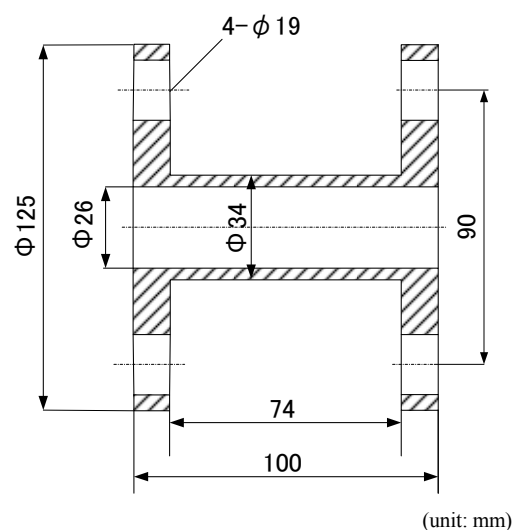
Cross-sectional drawing of type-304 short-pipe specimen
